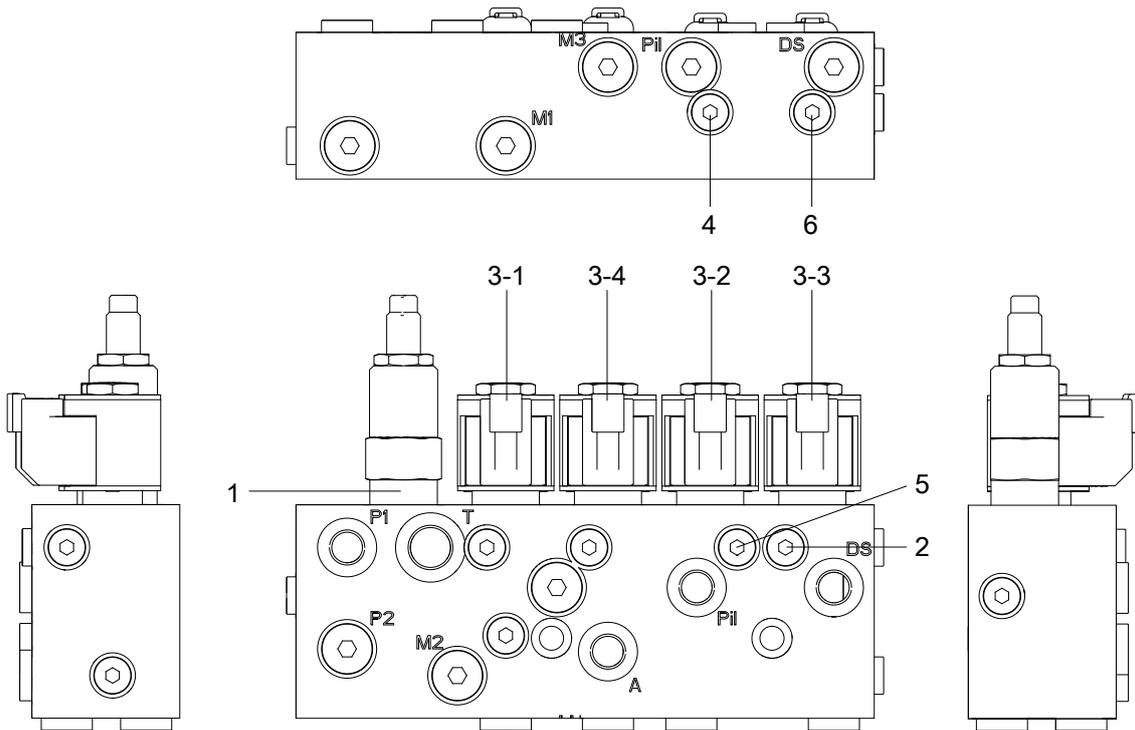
Brake & Two-speed Oscillating Control Valve (PN.202040003183)
